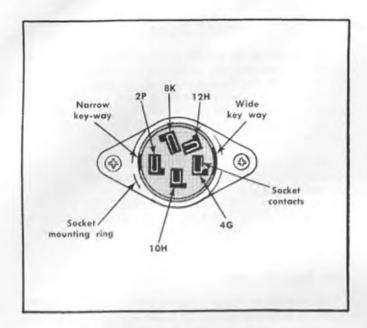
Nuvistor socket detail, showing location of key-ways, (top view).
